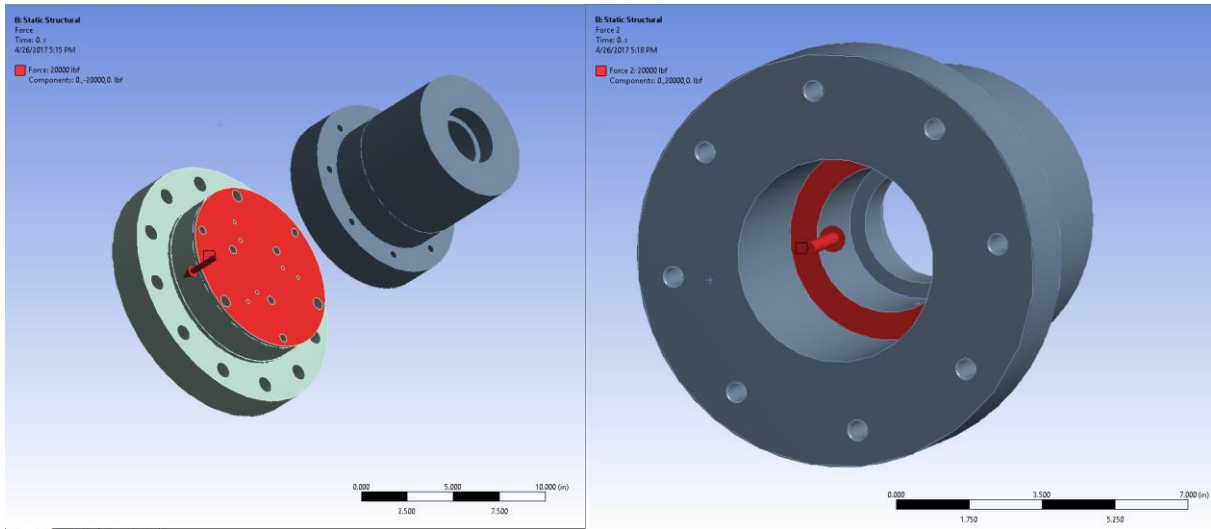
Applied forces on end plug (Left) and slave bearing housing (Right)
